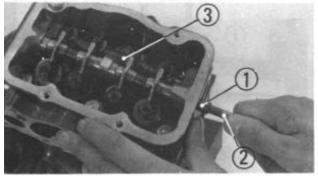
① Valve rocker arm shaft ② Camshaft ② 8 mm bolt
